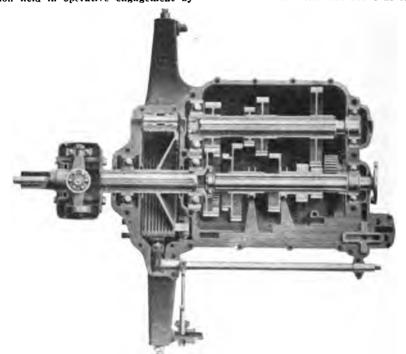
The Moore Cor. Section of transmissio gear case, transmission brake and universal joint. All bearings "Hesse-Bright" balls, the valve admittin water to the brake drum is shown at the bottom of cut, the teeth of the ratchet sprag action are seen on the edge of brake drum nearest gears. The torsion member and its rigid surrounding sleeve con prising the elastic driving shaft are seen at the extreme right. Note grooved brake drum giving ver large surface, also note the ball bearing universal
